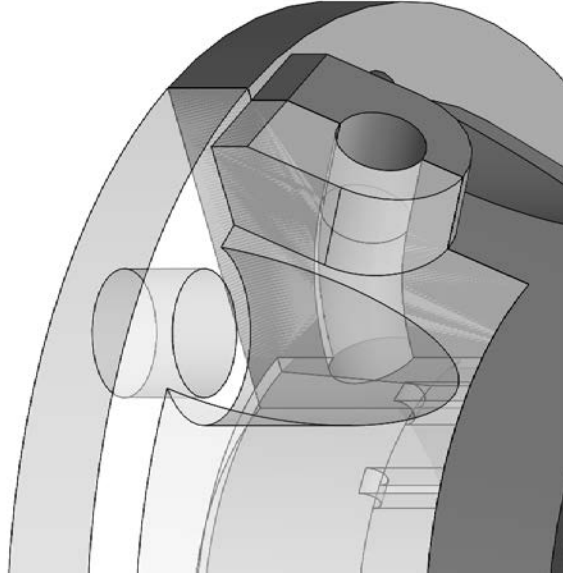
Section View of Chamber-Nozzle Base and Outlet
